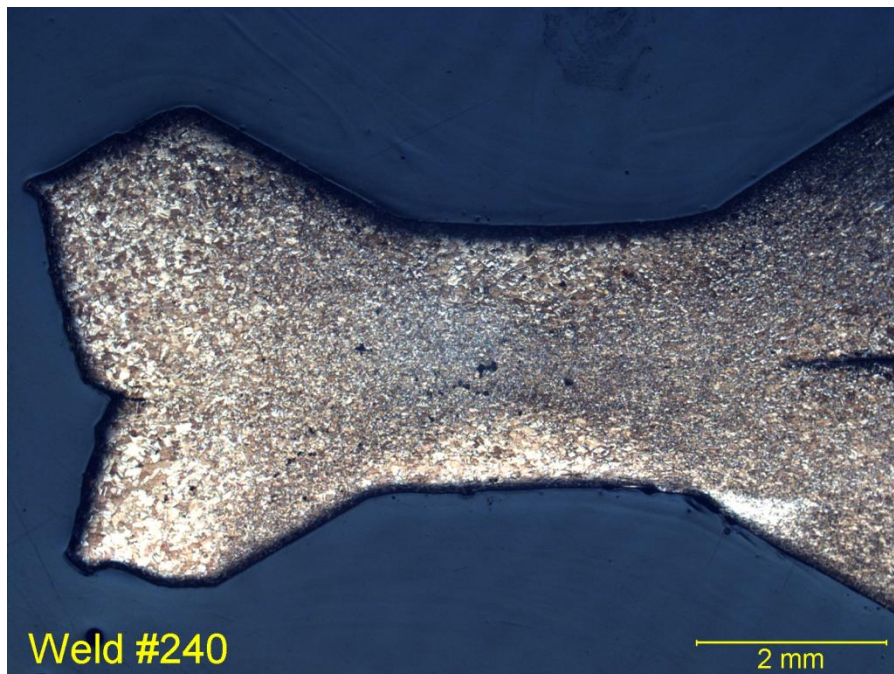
Micrograph of Weld 240 showing Bond and Microstructure of Parallel-Wire Joint using Best-Practice Welding Parameter (The section was cut parallel to the wire orientation.)
